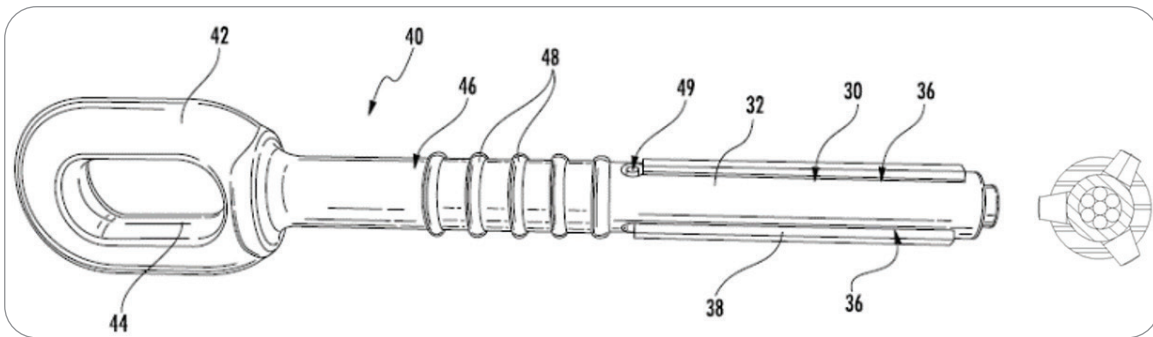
SOLO HD steel eye core assembly with stainless barrel ^{6,7}
